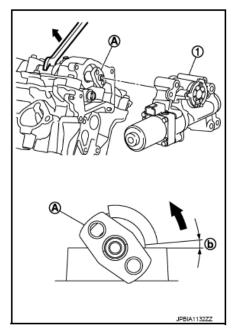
Holding Flat Areas Of Control Shaft Using Wrench Courtesy of NISSAN MOTOR CO., U.S.A.
